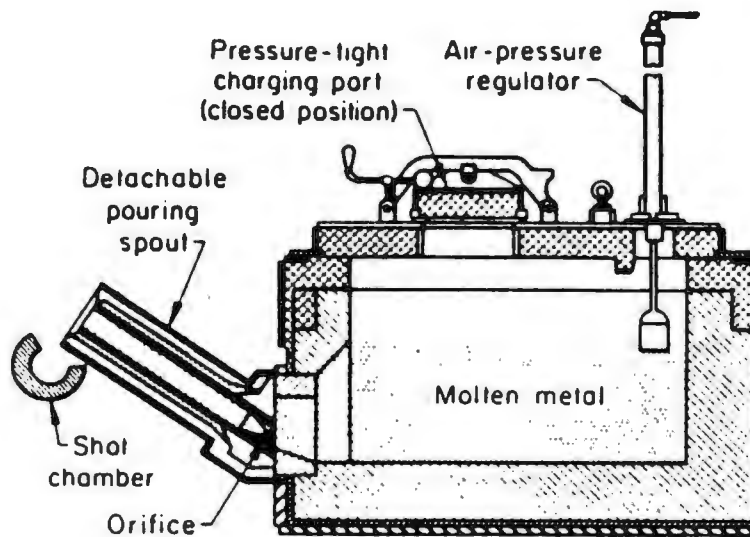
Air-Pressure System For Supplying Clean Molten Metal to the Shot Chamber of a Cold-Chamber Die Casting Machine (Reprinted from [12])
